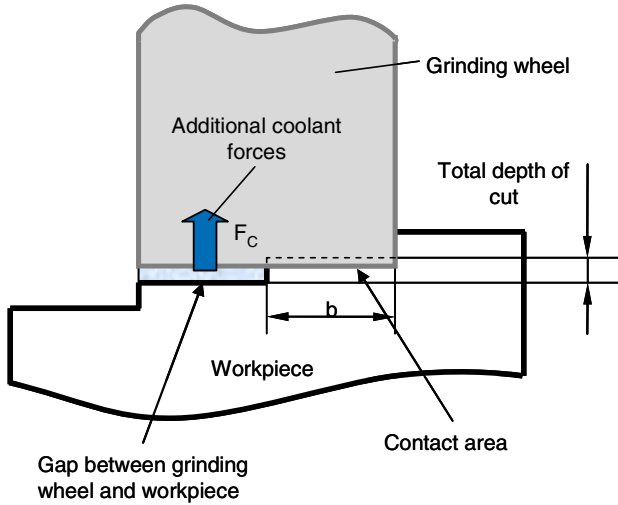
Additional coolant forces by means of workpiece geometry
